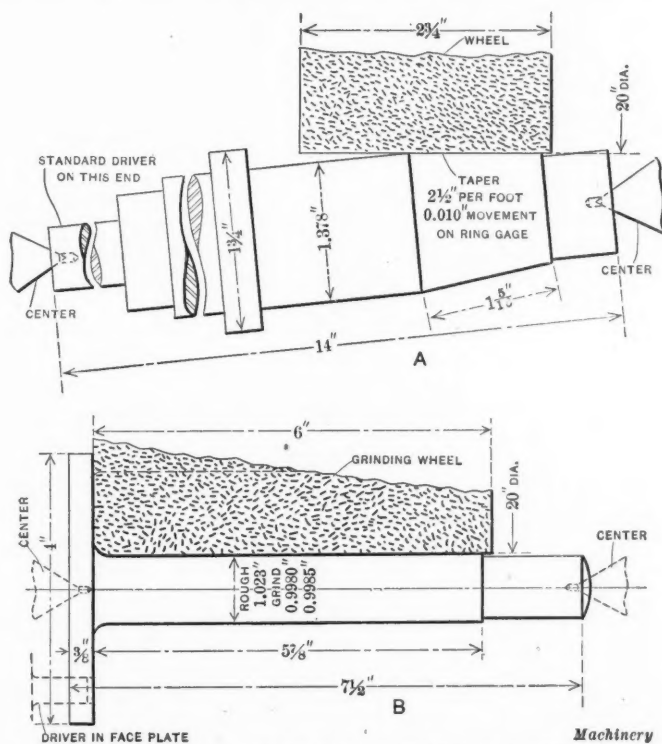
Examples of form-grinding Transmission Main Drive Shafts
